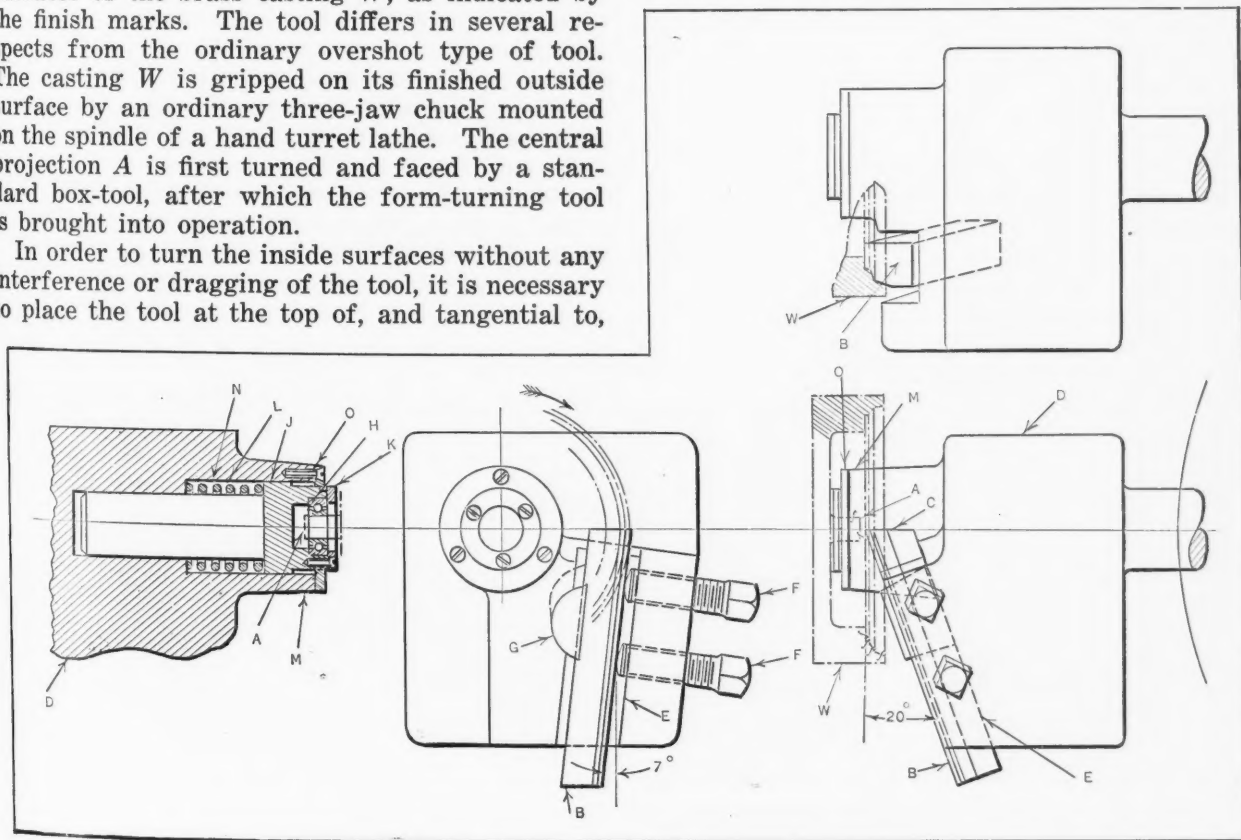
Overshot Forming Tool for Use in the Turret Lathe
